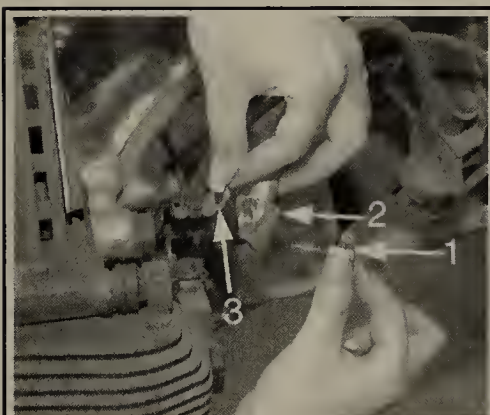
Remove the bolt (1), brake line (2) and washer from the caliper
